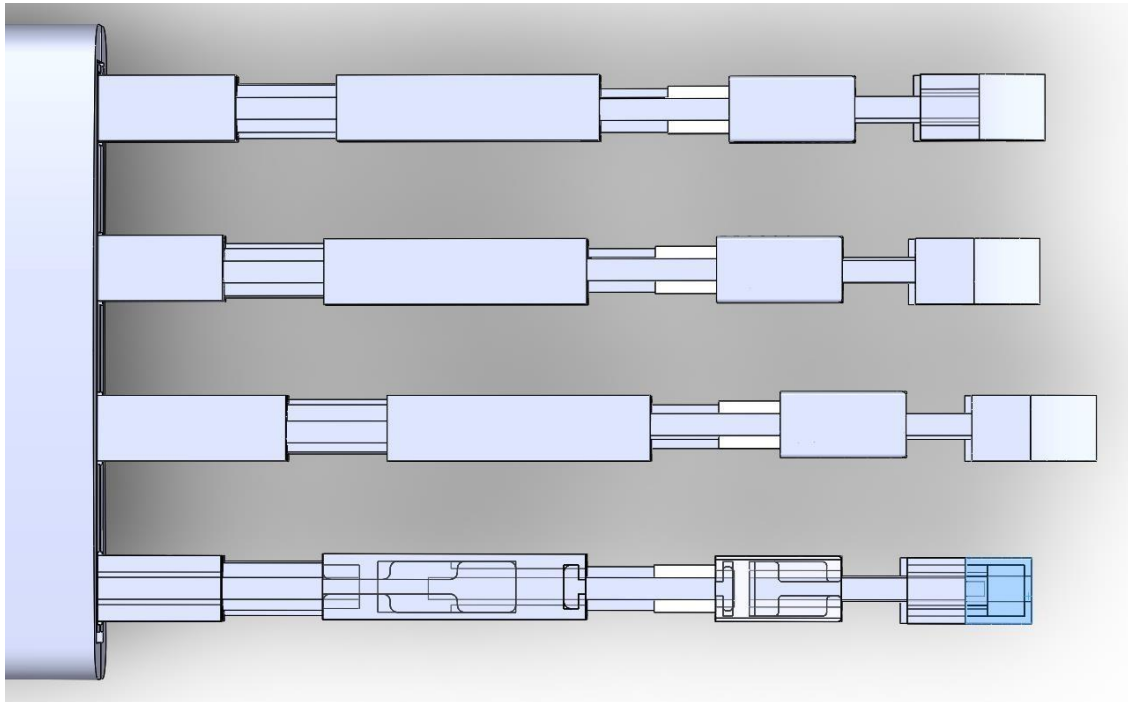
Final CAD Model: Assembly of all fingers connected to the hand module via the metacarpal links.
